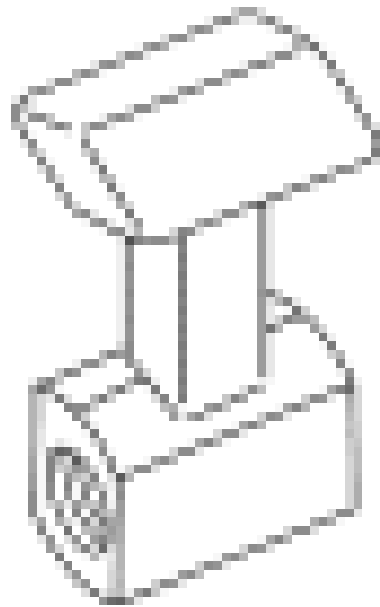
Installing Crankshaft Front Oil Seal Using Camshaft Front Oil Seal Installer
